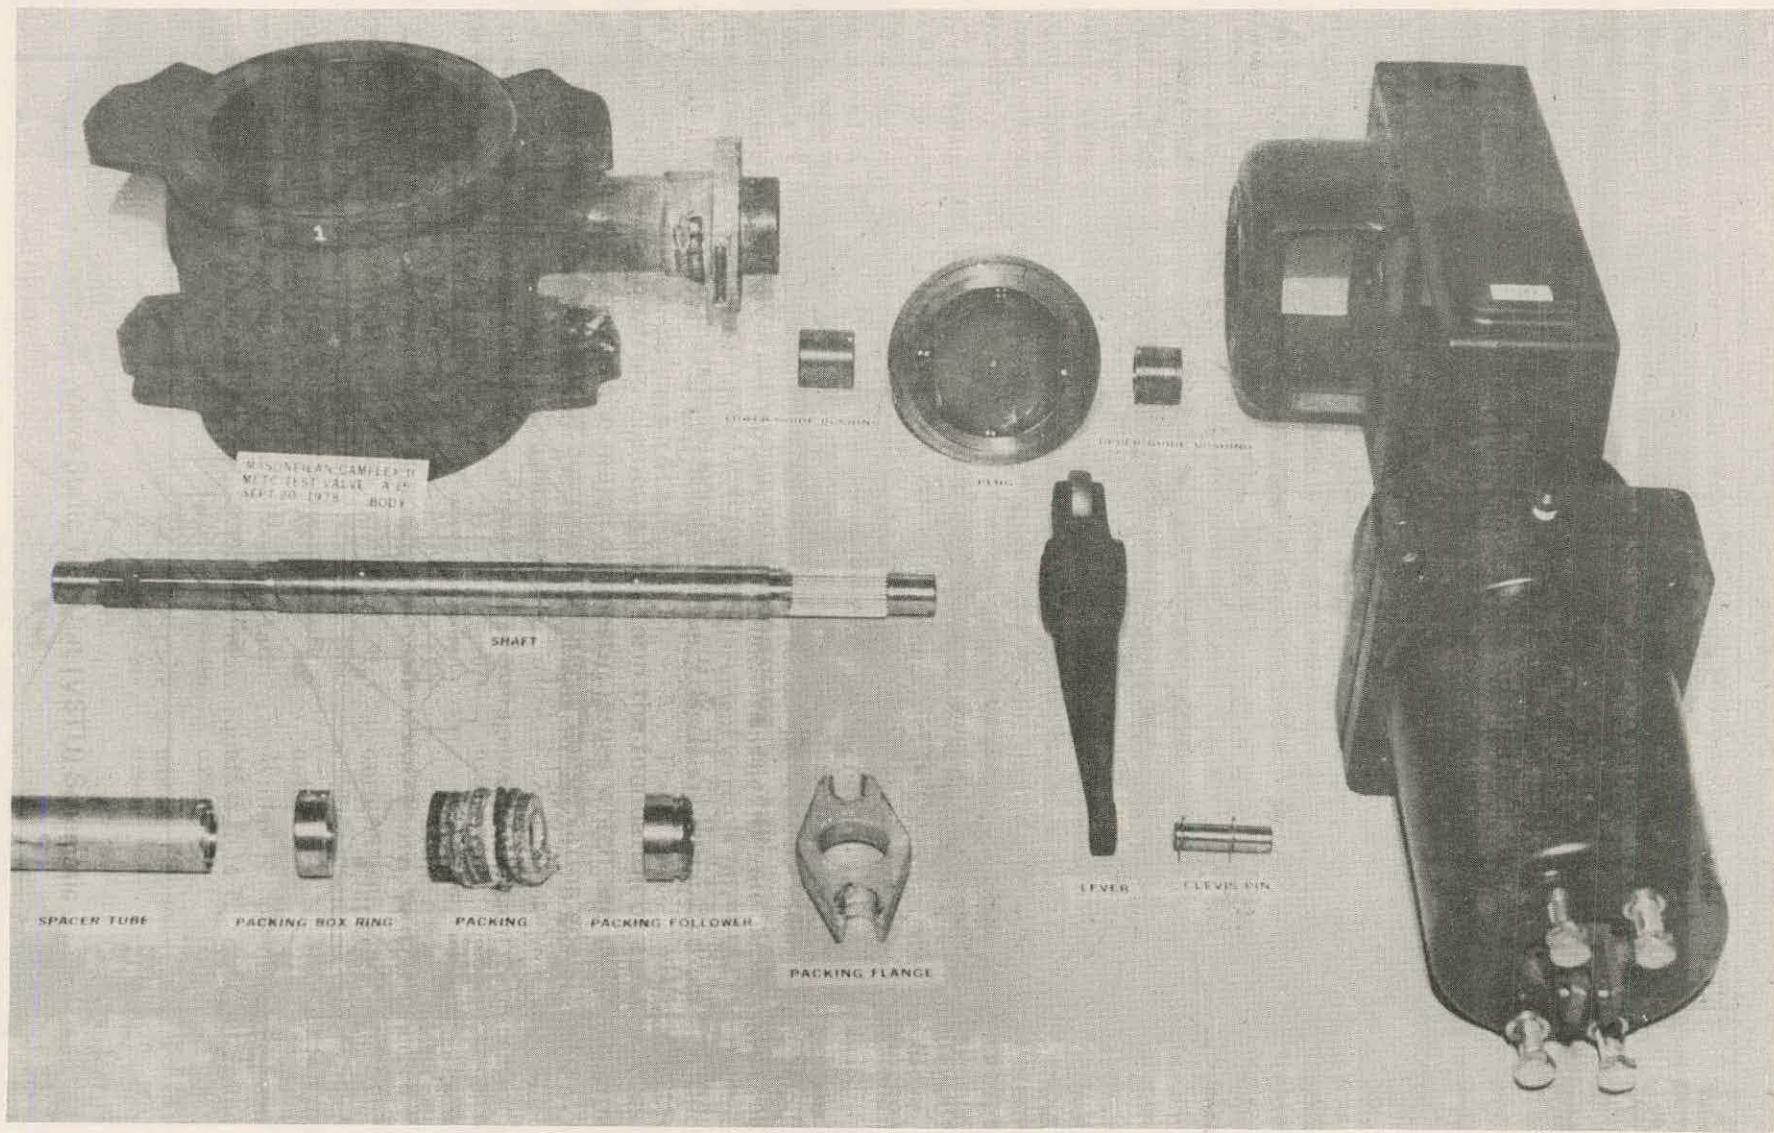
Component Parts of Masoneilan Camflex II Valve--METC SOA Test Valve No. A-15
